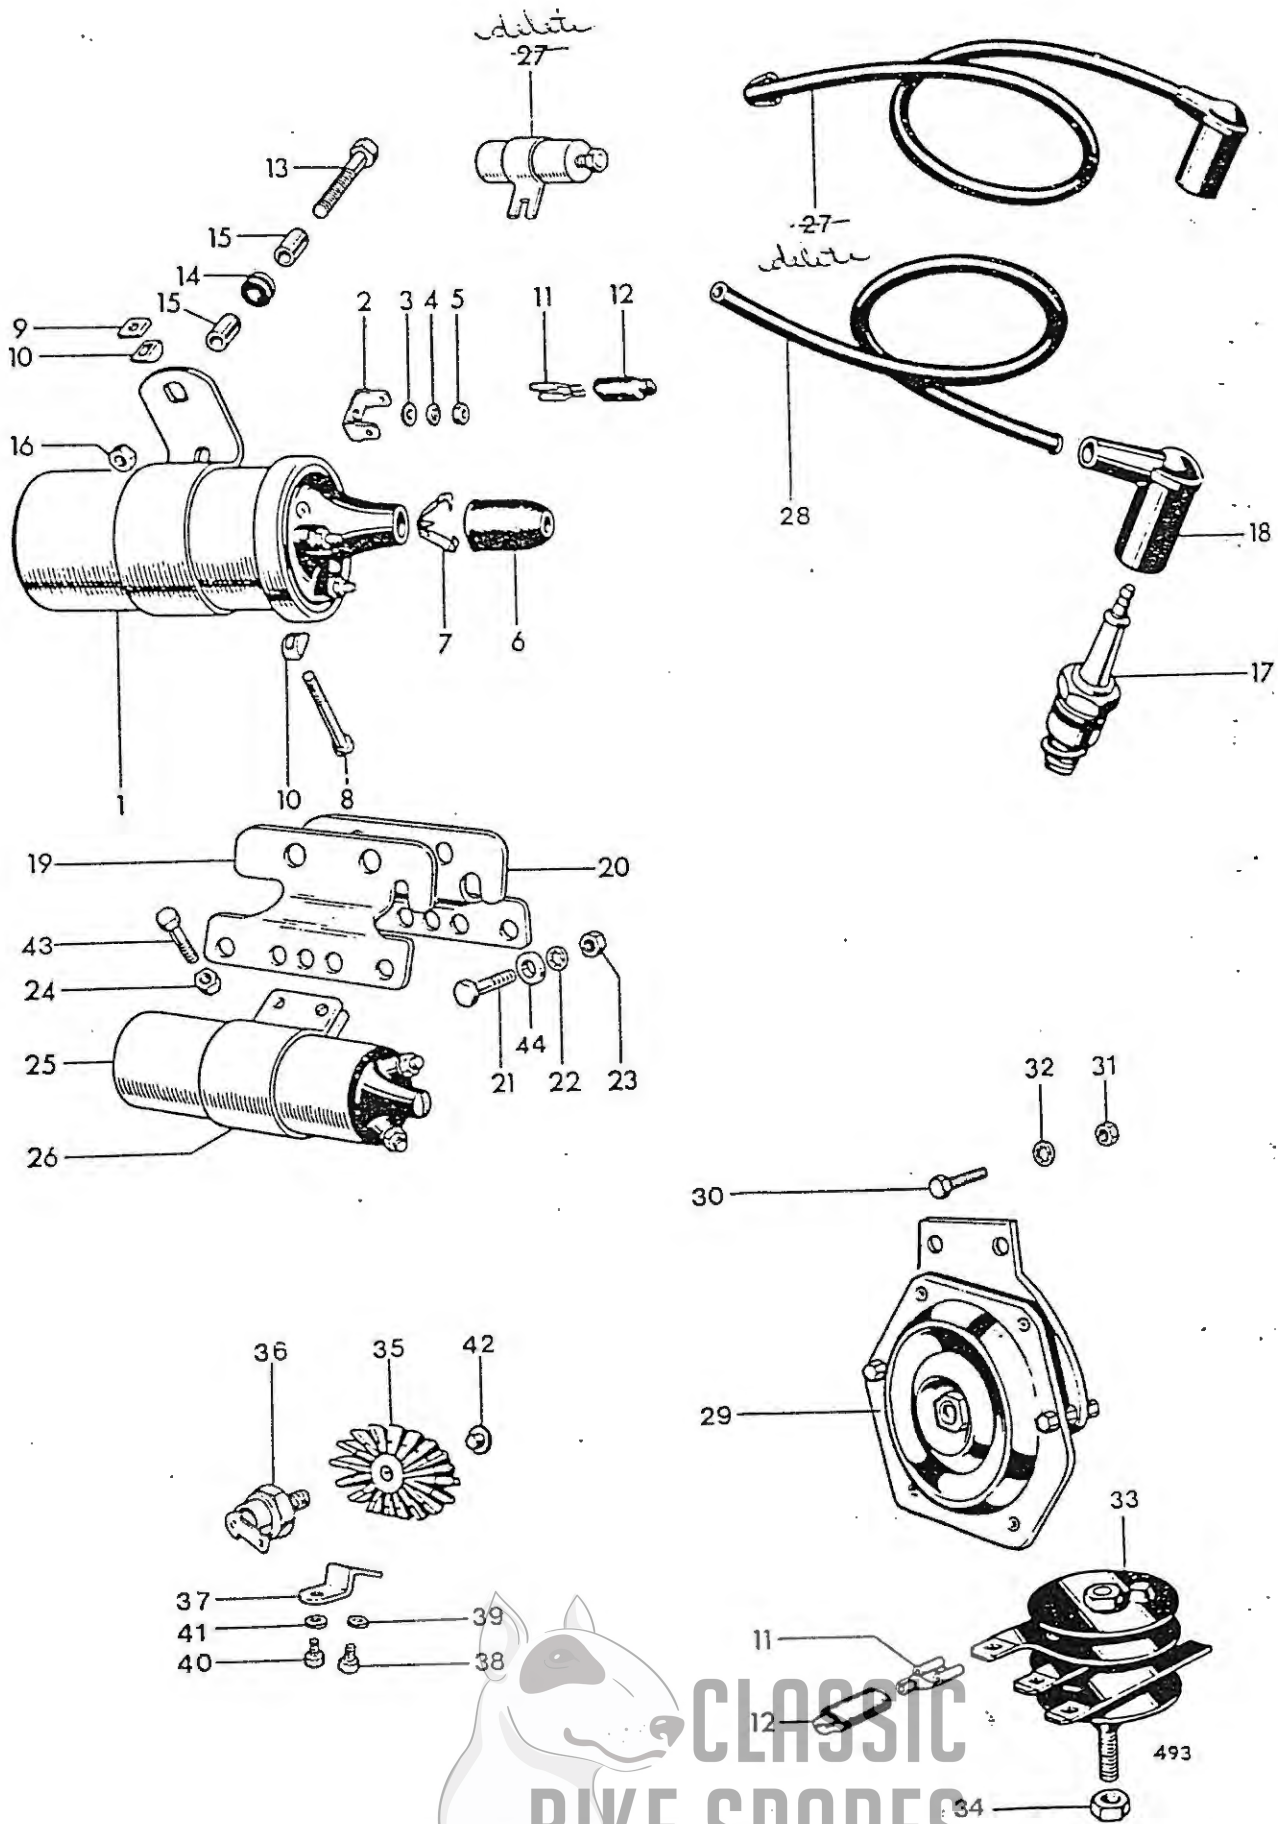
IGNITION COILS, HORN, RECTIFIER AND ZENER DIODE
